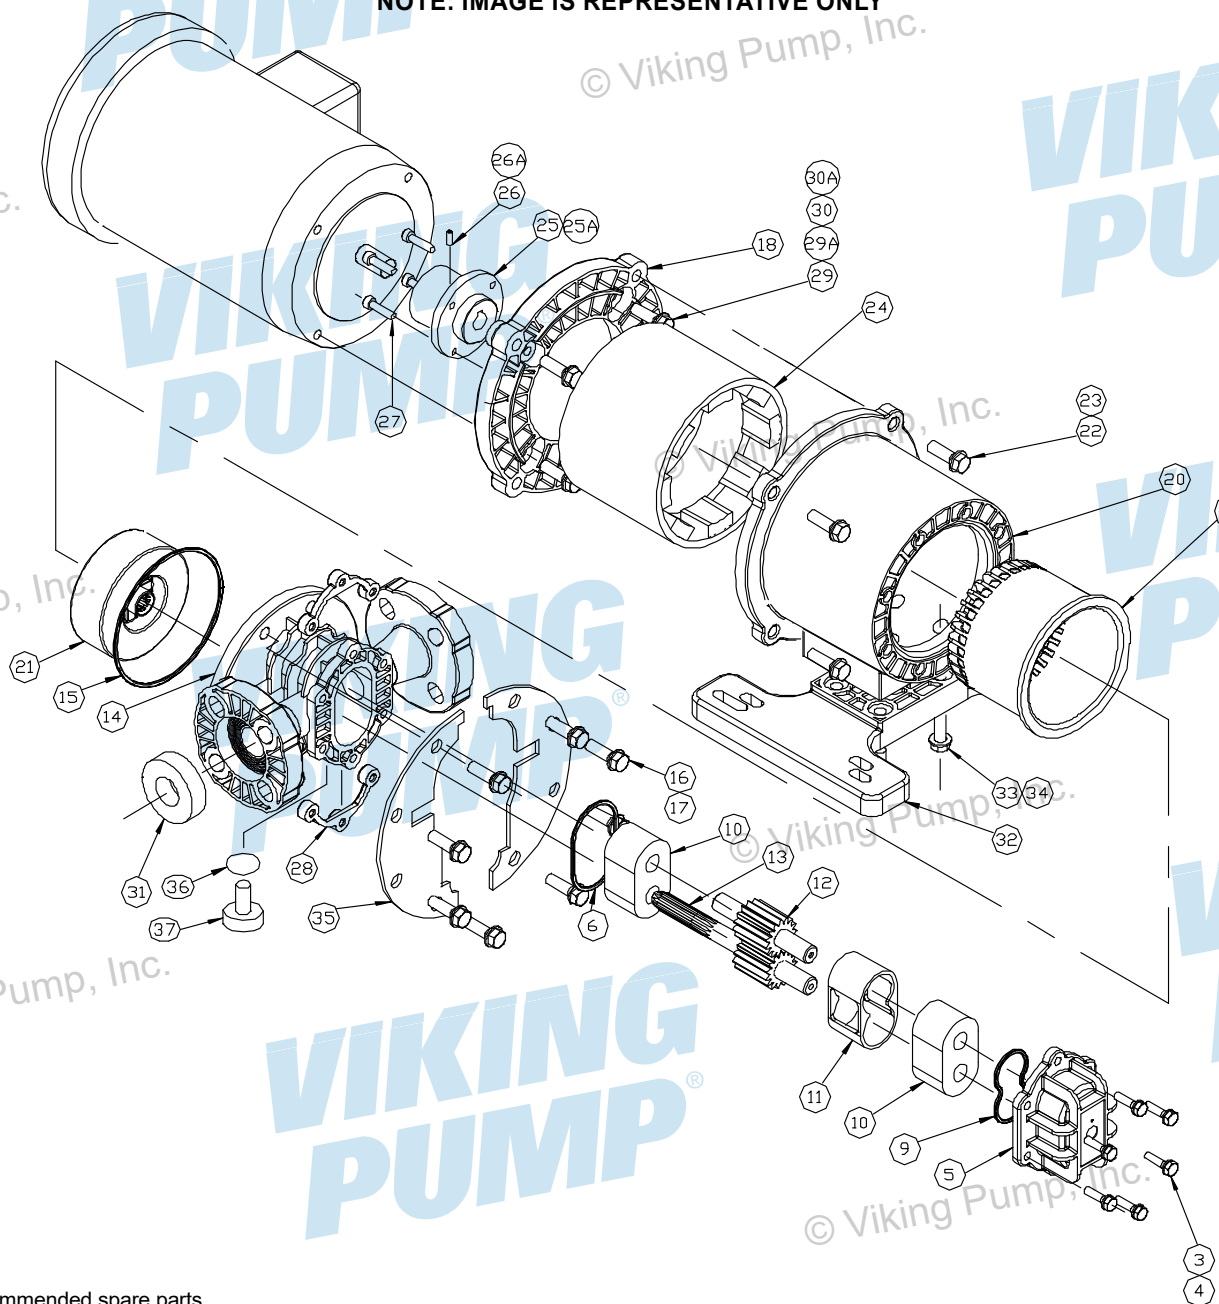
EXPLODED VIEW E12 PUMP (TYPICAL)
